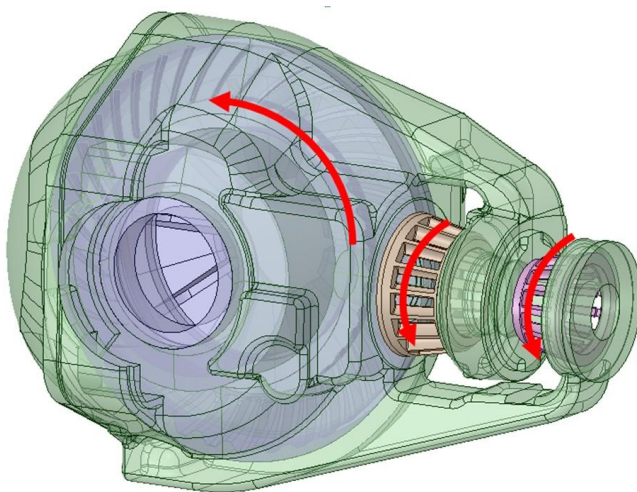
The final drive internal volume, gear wheel and bearings rotation directions.
